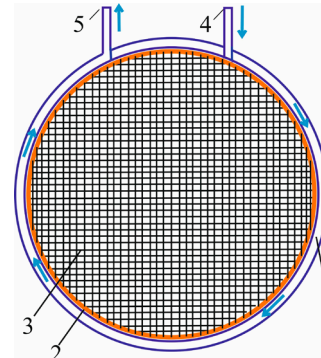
Cold heat exchanger in cross-section: 1 – copper tube with a diameter of 6 mm; 2 – copper tube with a diameter of 64 mm; 3 – copper plates of heat exchanger; 4 – inlet pipe; 5 – outlet pipe
